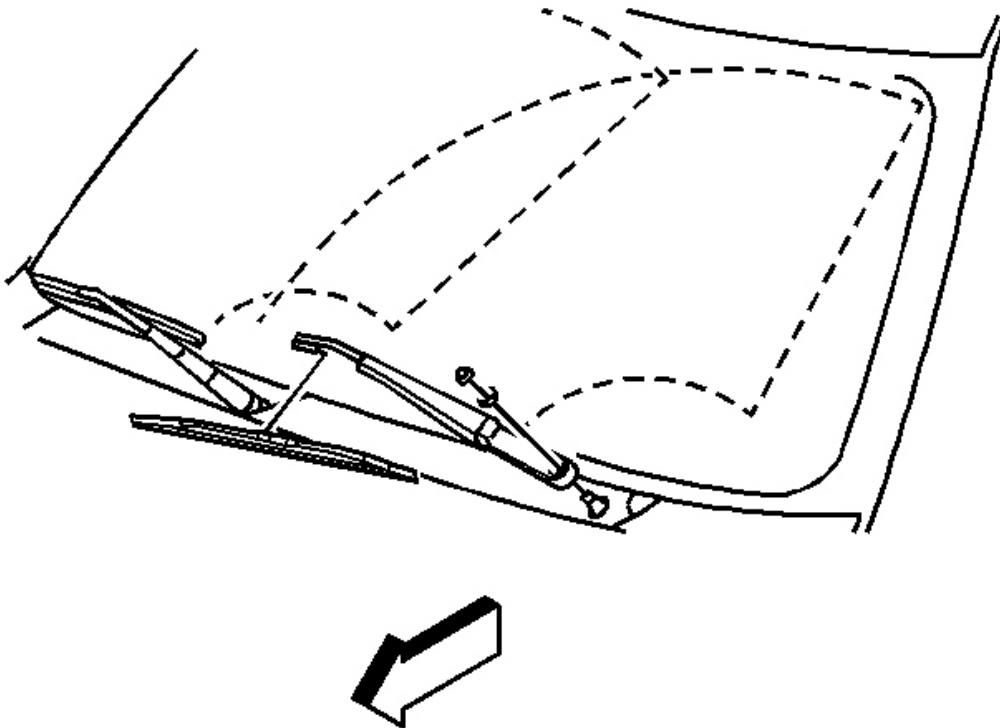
View Of Wiper Arm Blade & Wiper Arm
